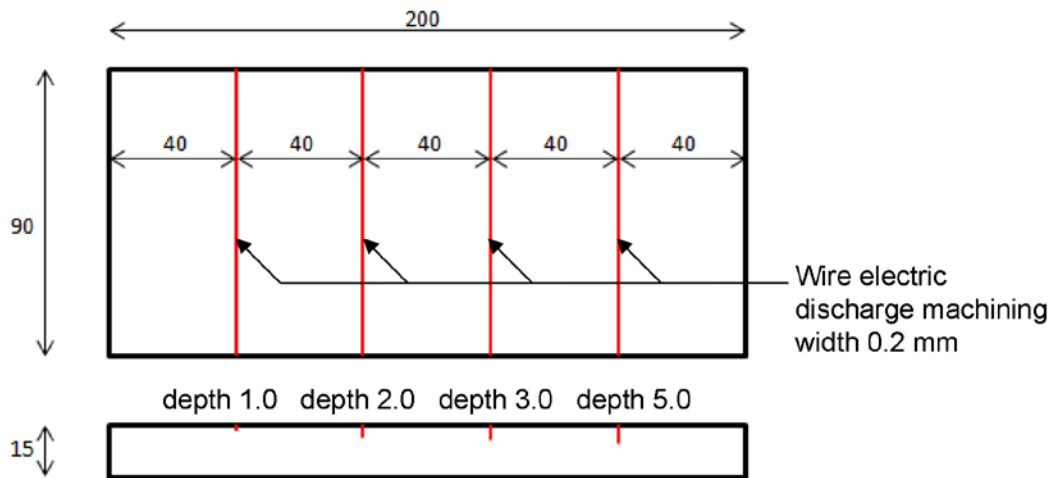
Dimensions of the Type-316 Stainless Steel Plate Specimen
